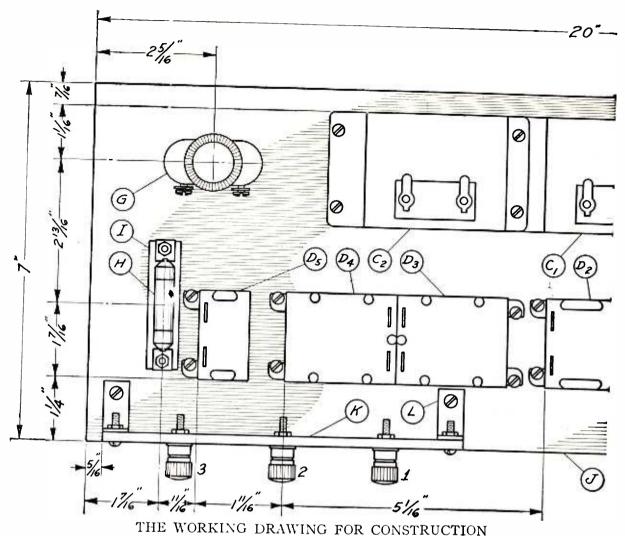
This drawing gives the correct dimensions and spacing for mounting all the component parts of the plate supply unit.
